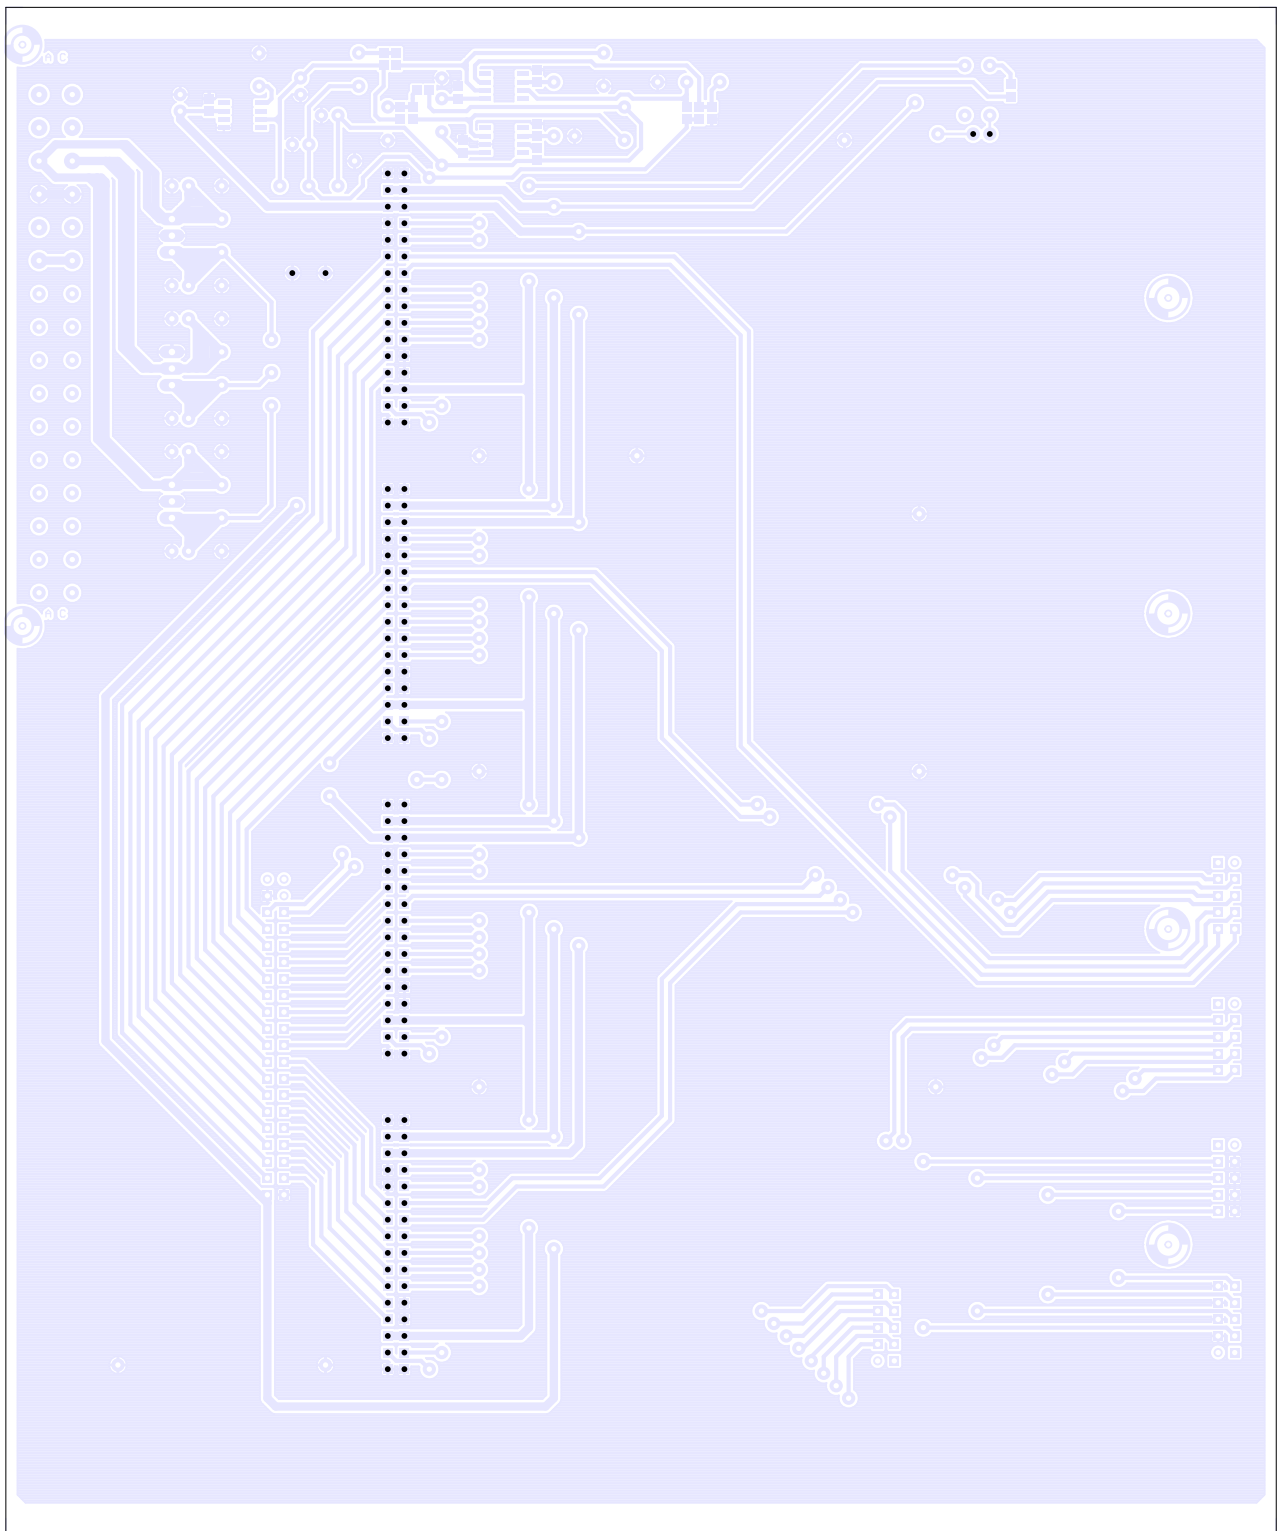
Board bottom view showing drills with $\approx 0.9\text{ mm}$ ($\approx 0.03543\text{ in}$) diameter
